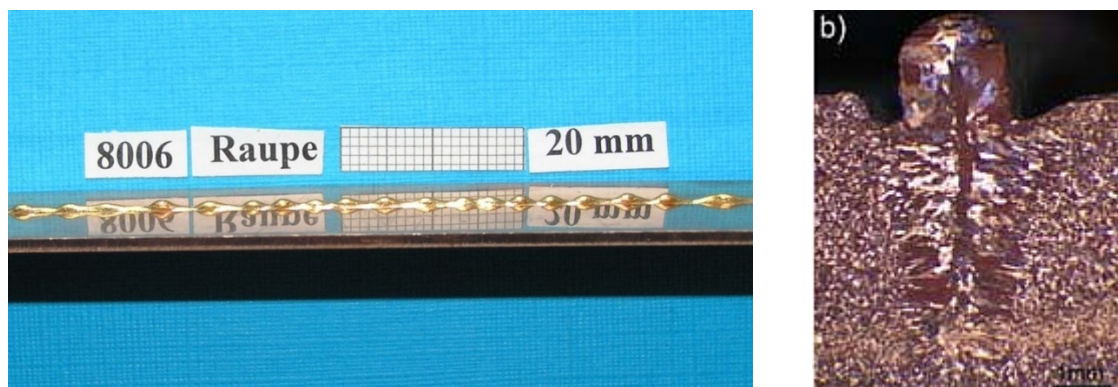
The Humping on 1.5 mm DHP-copper, a) welding bead b) cross-section of hump, (beam current 90 mA, work distance 20 mm, welding speed 15m/min)
